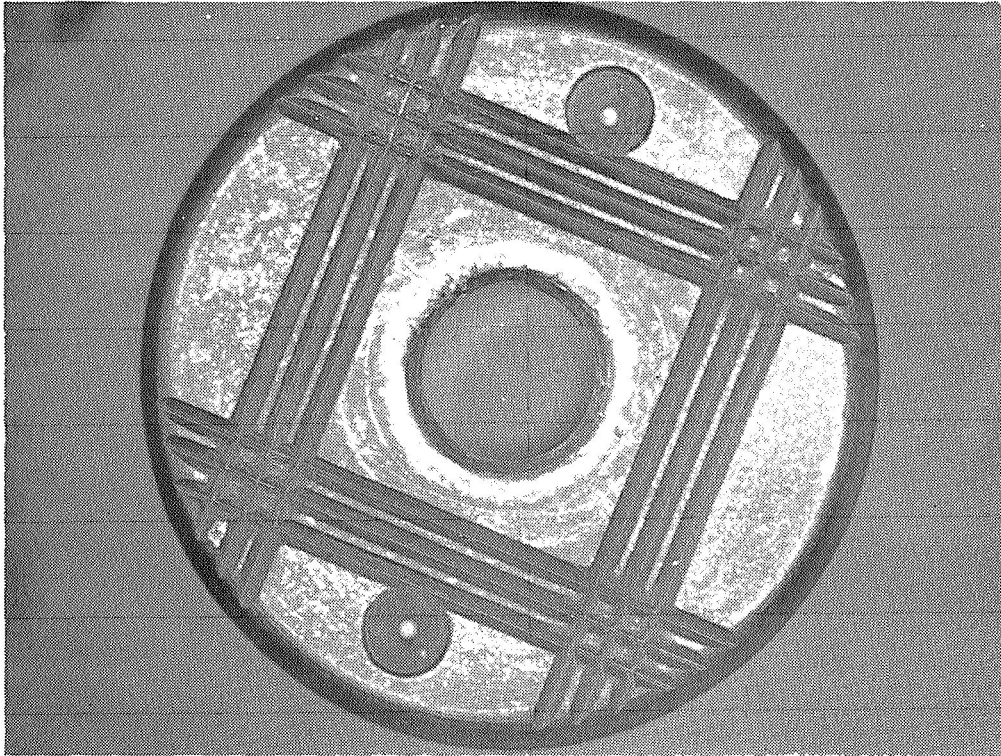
1 Valve Actuator Piston After Task III Testing
